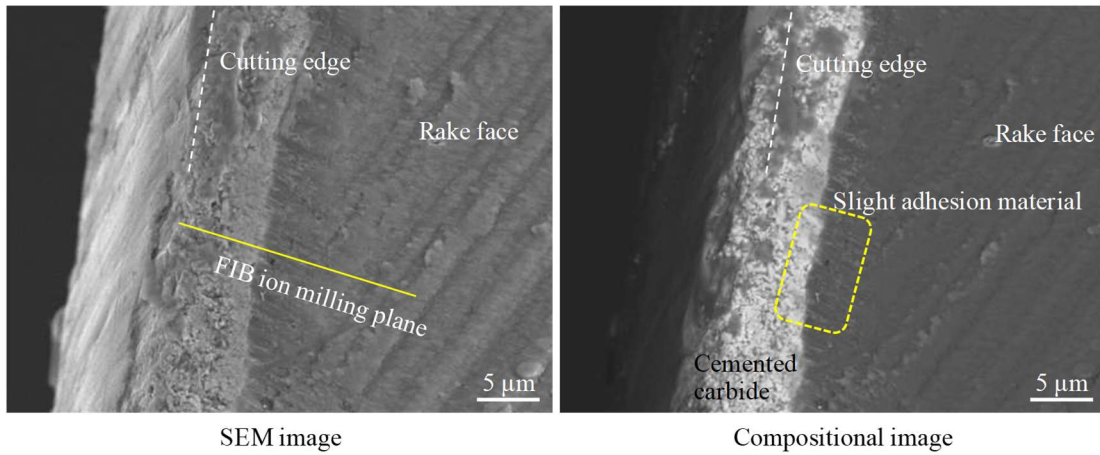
SEM and compositional images of the coated cutting edge on the rake face after machining of Alloy 718. TiN coated end-mill tools, cutting speed $V = 40$ m/min, feed rate $f = 0.04$ mm/tooth, $a_p = 6$ mm, $a_e = 0.3$ mm, cutting length $L = 0.2$ m, coating thickness: $2 \mu\text{m}$.
